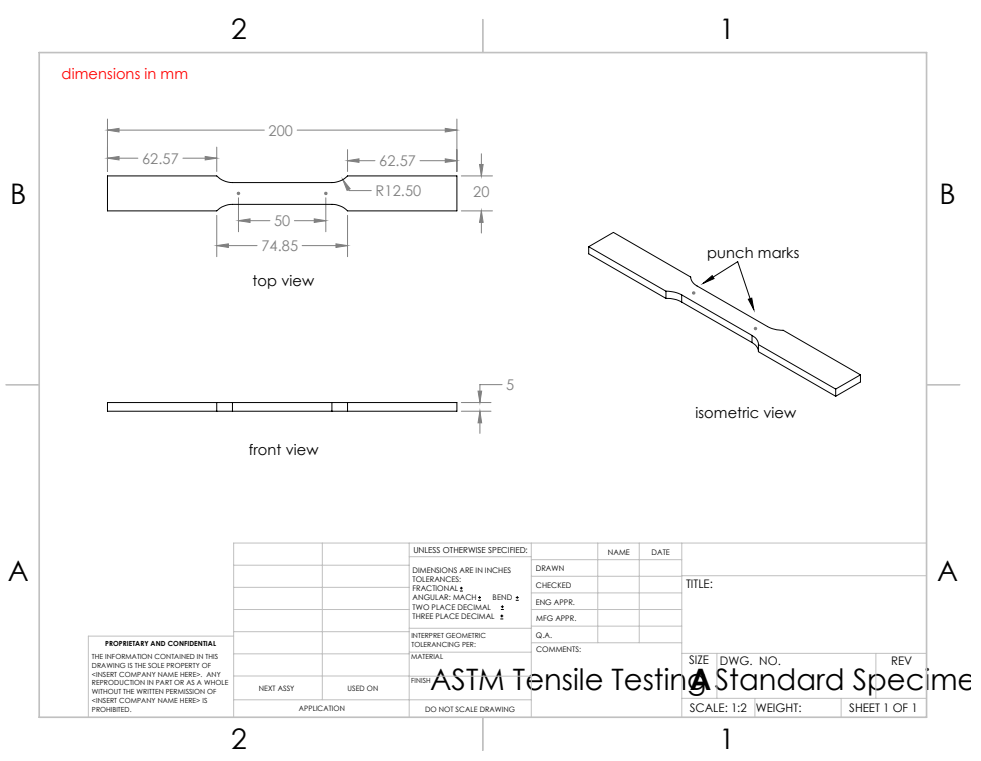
SolidWorks drawing of the tensile testing specimen design.
